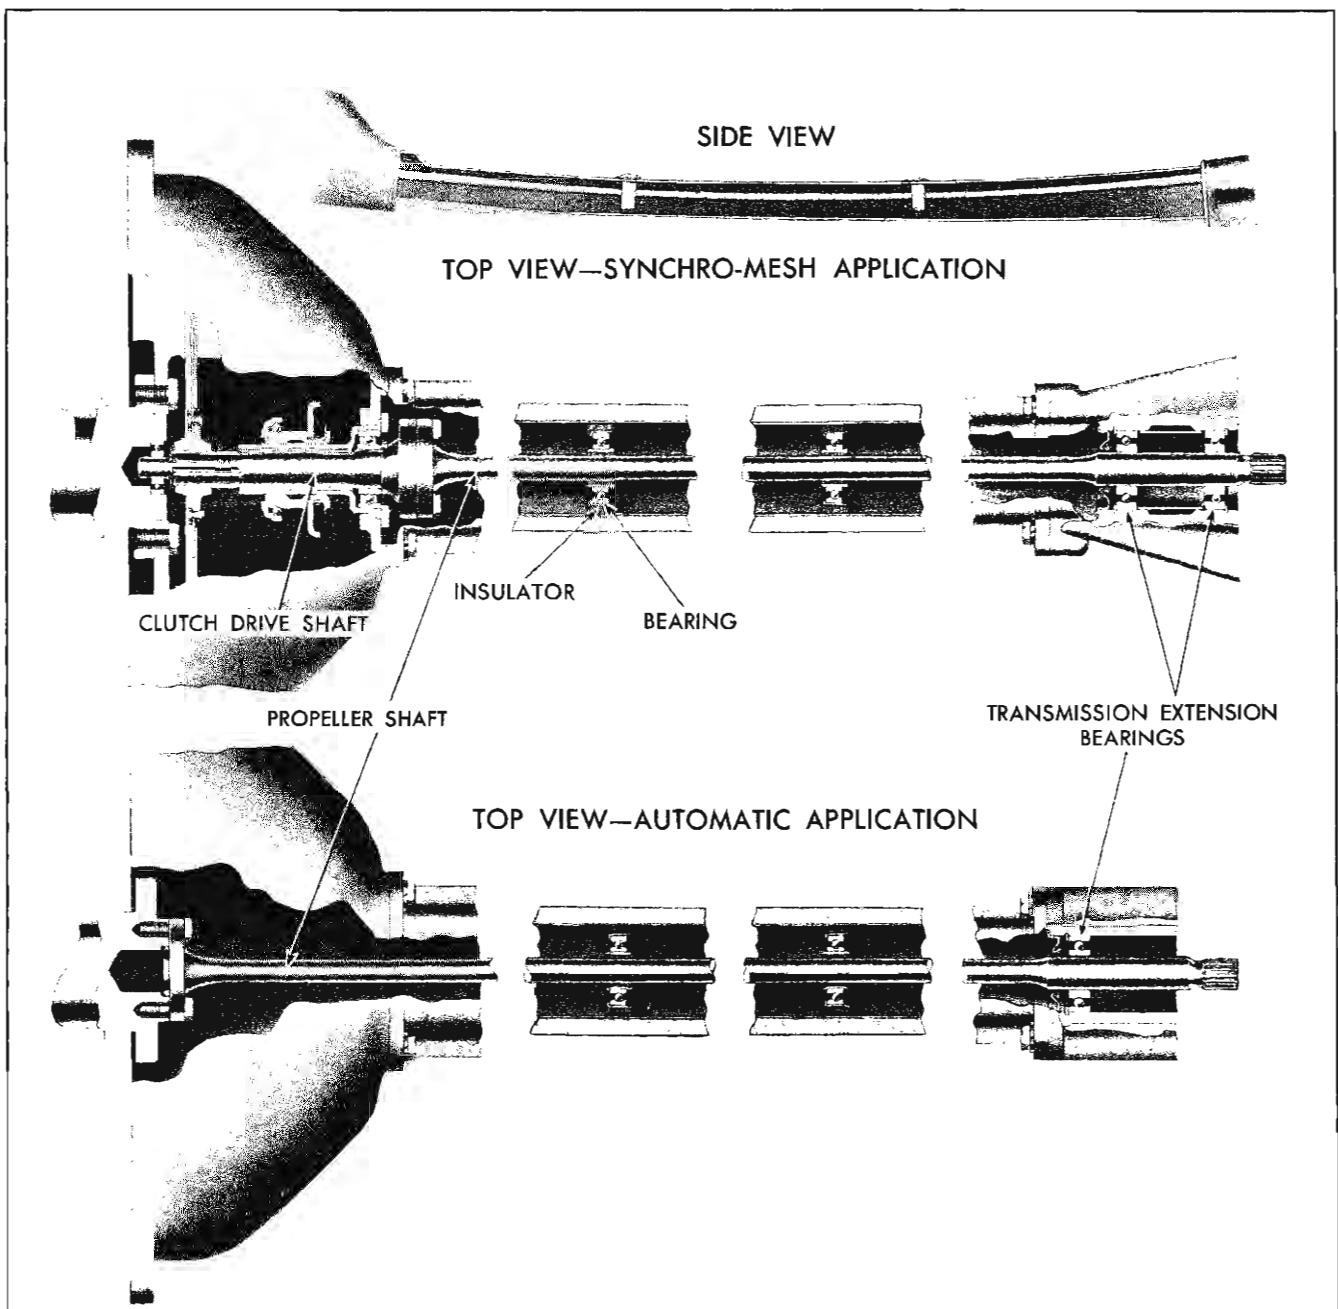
Cross Section of Propeller Shaft and Torque Tube
